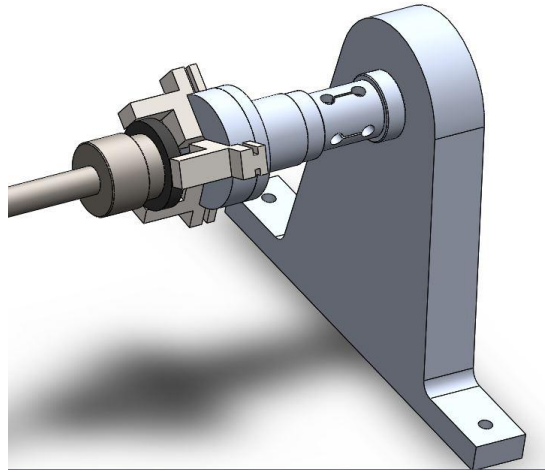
Side View of Selected Bearing-Shaft Interface Design
